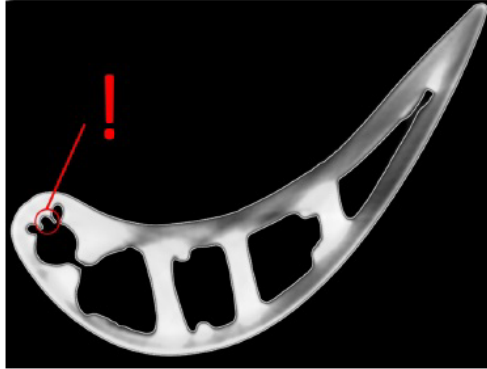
Incorrectly manufactured cooling passages in blade 1
